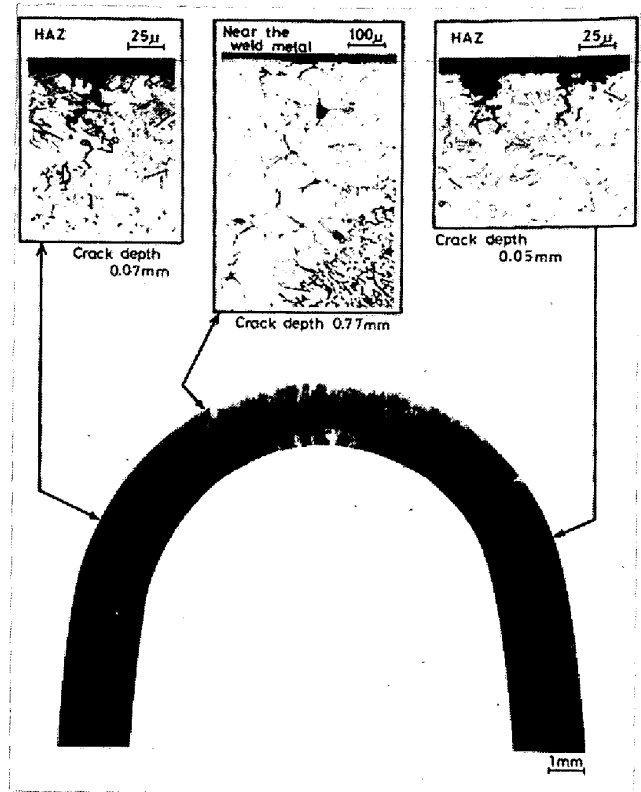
SCC of low heat input weldment of SUS 321.
